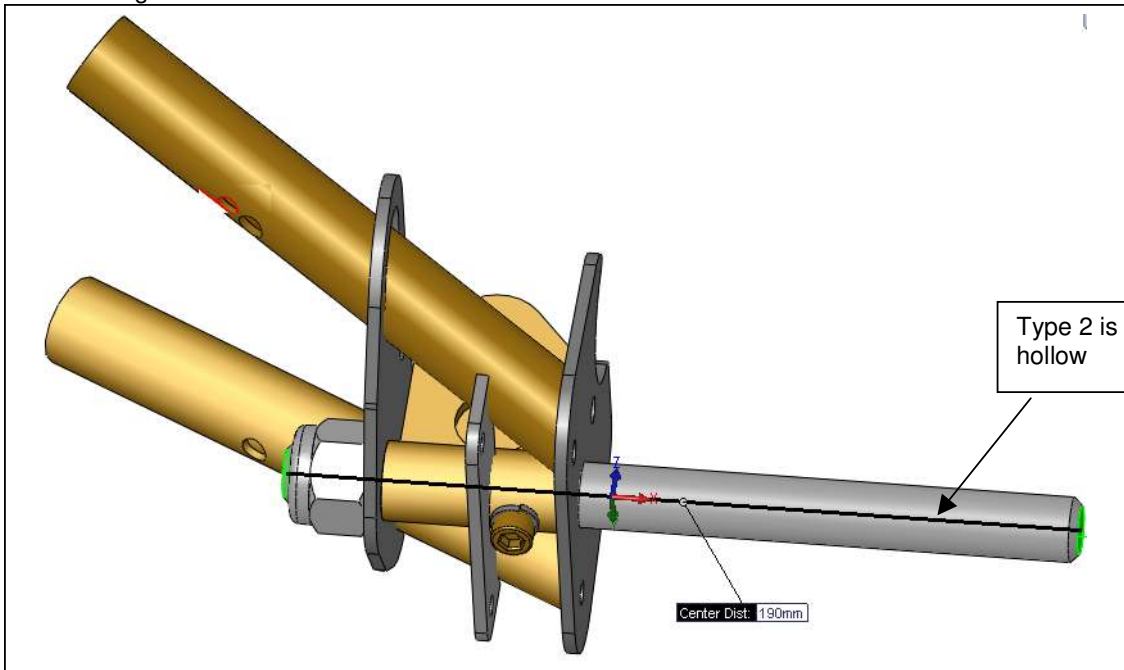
Type 2 axle image (From 7392). To be replaced by the type 4 axle using the retrofit kit 110030 - HUB AXLE EDGE XT TYPE 4 RETRO KIT
